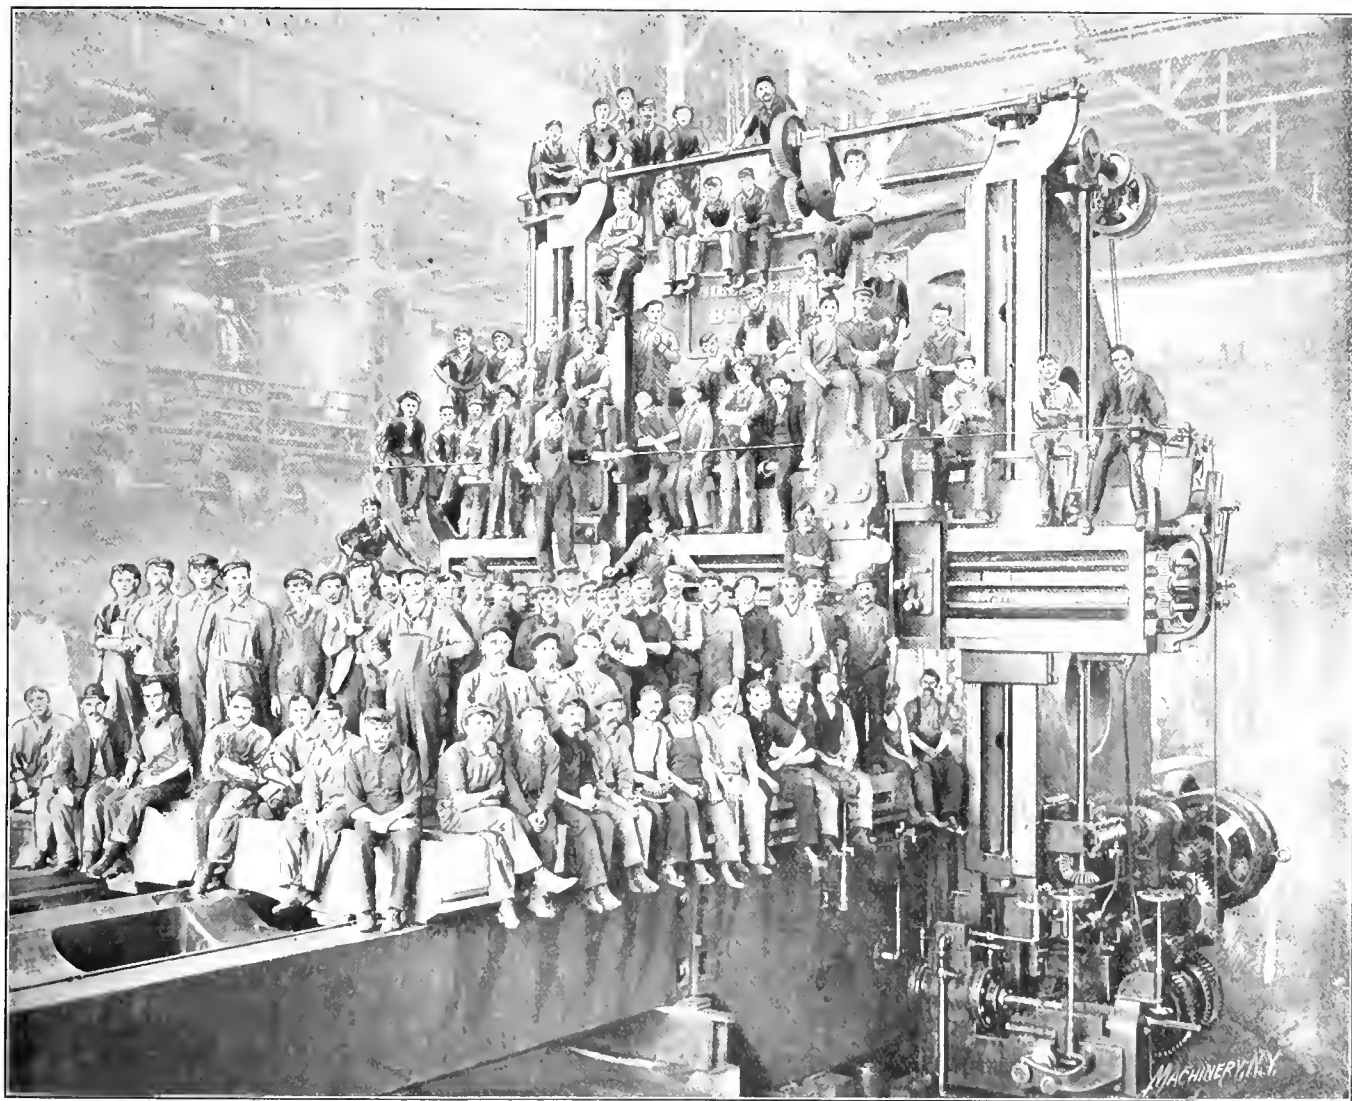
Gigantic 14-foot Planer built at the Bement-Miles Works of the Niles-Bement-Pond Co.
